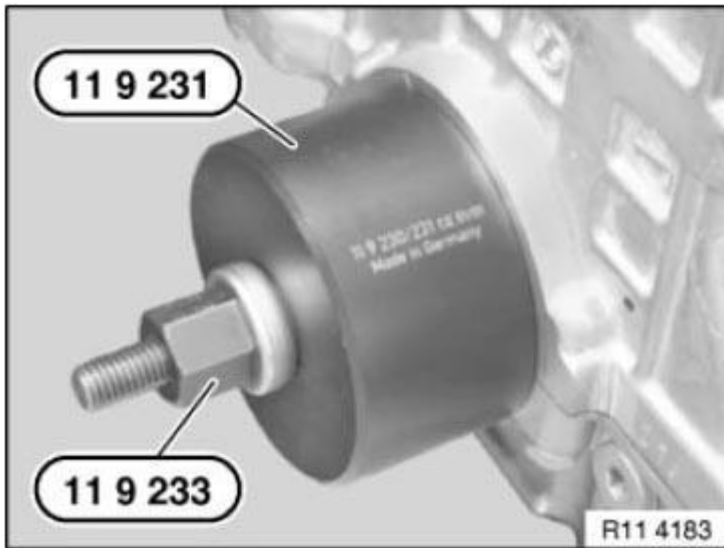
Identifying Special Tools 119 231 And 11 9 233
